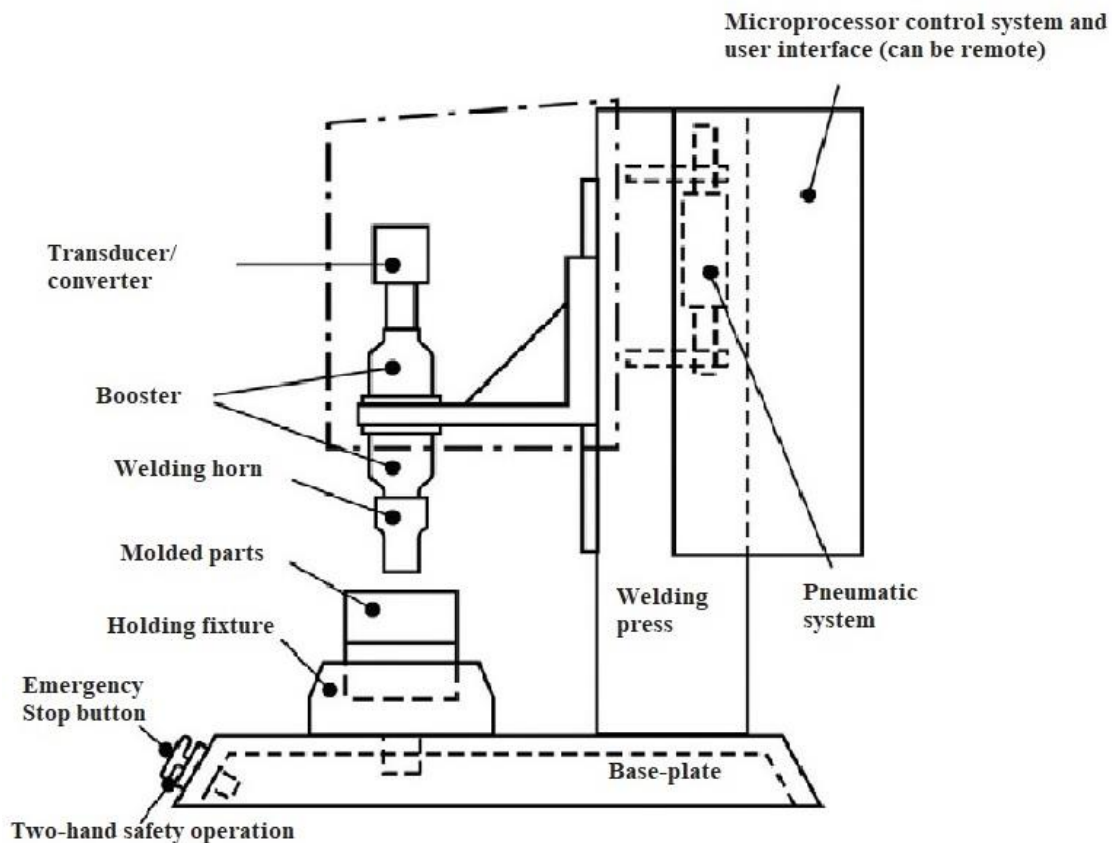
Layout of ultrasonic plastic welding machine [5]
